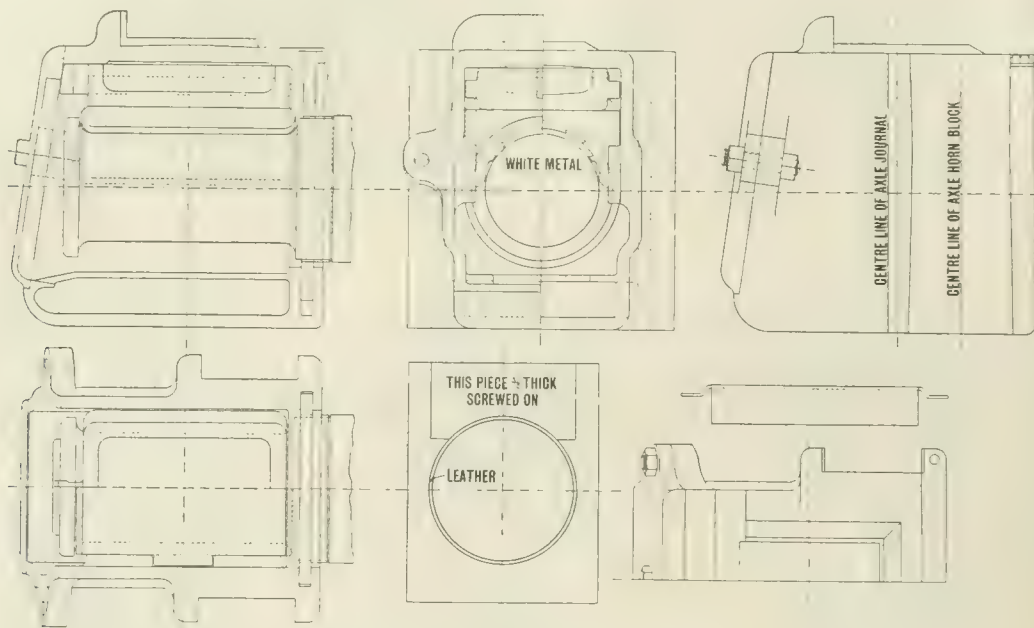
DETAILS OF AXLE BOX. Scale 1:8.
